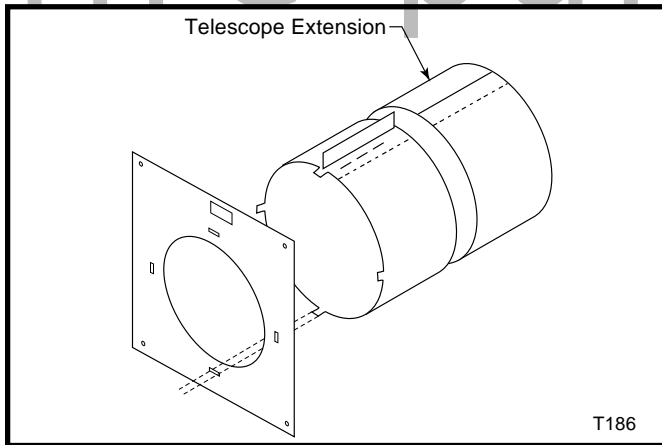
The telescope extension must be used if wall thickness is over 5" (127mm).
